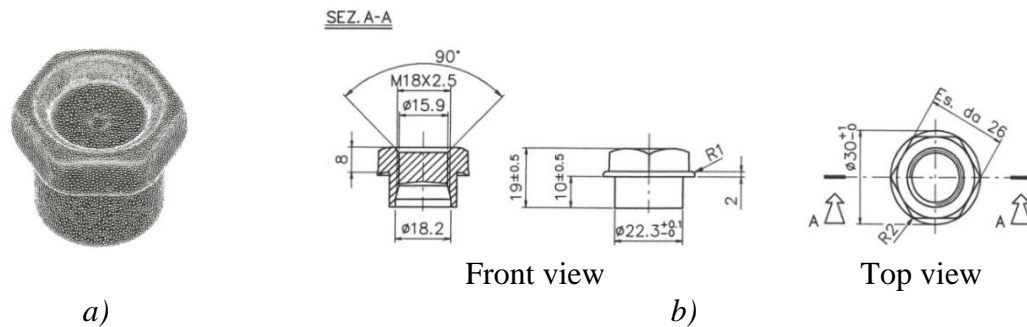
a) The hex-head plug fitting CAD geometry, and b) front and top views. All dimensions are in mm.
